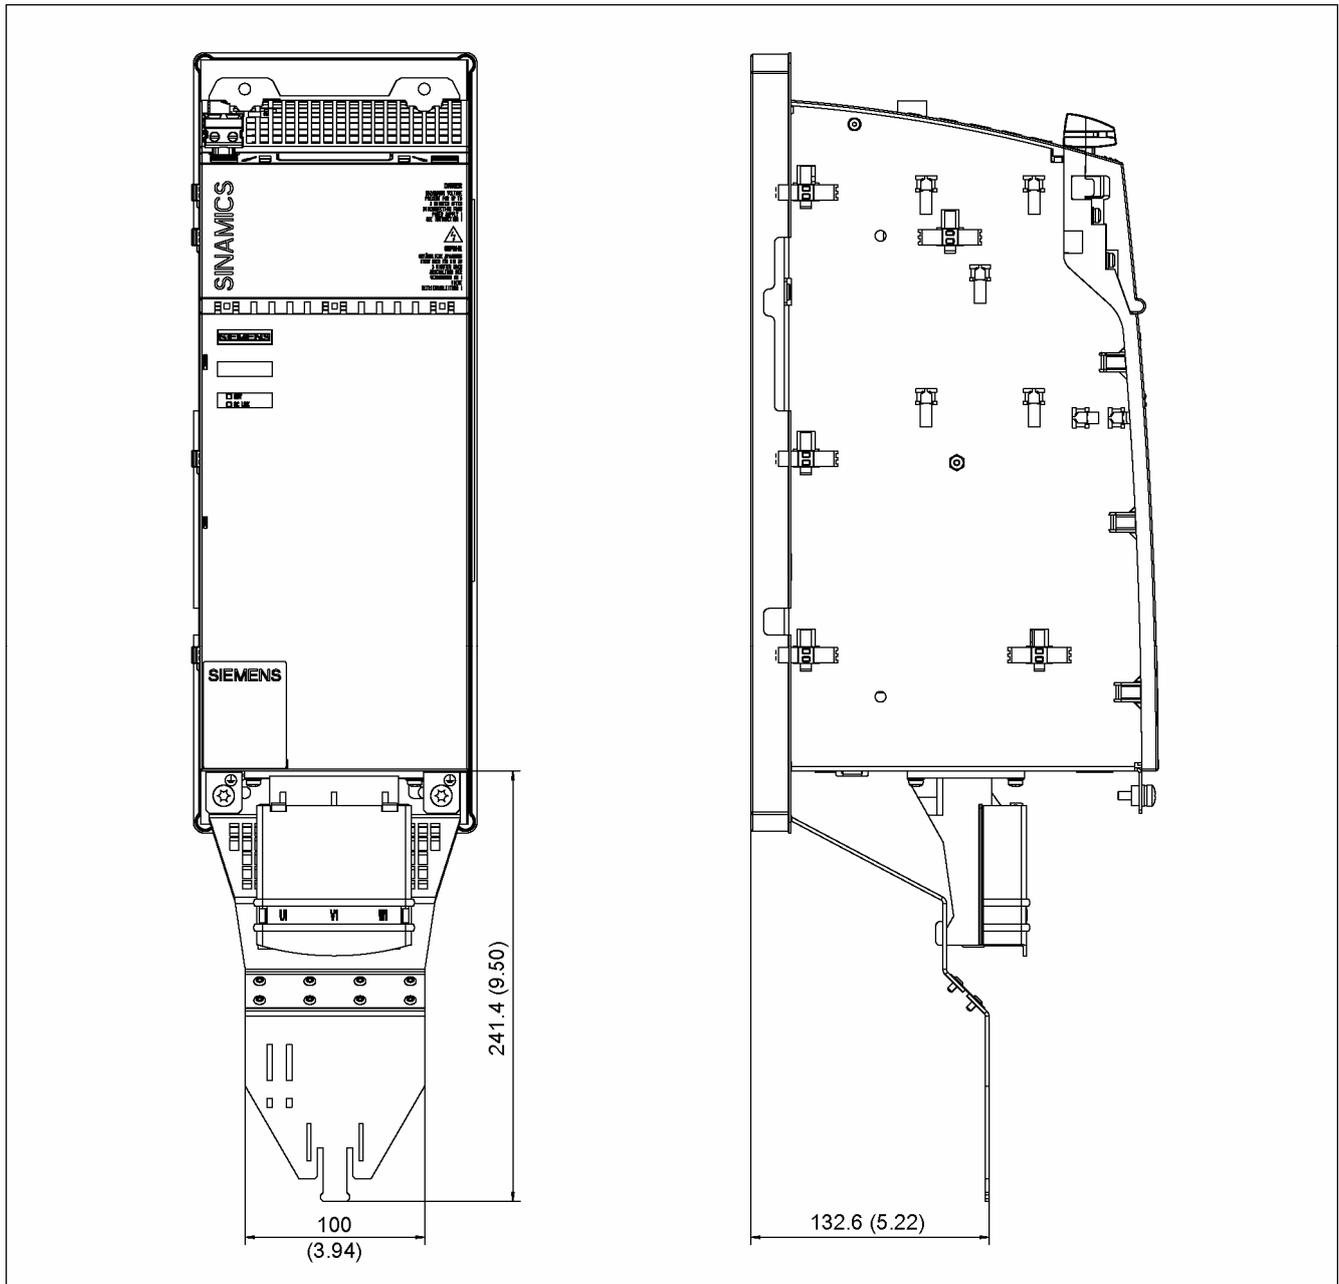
Dimension drawing, shield connecting plate on a 150 mm component with cold plate
